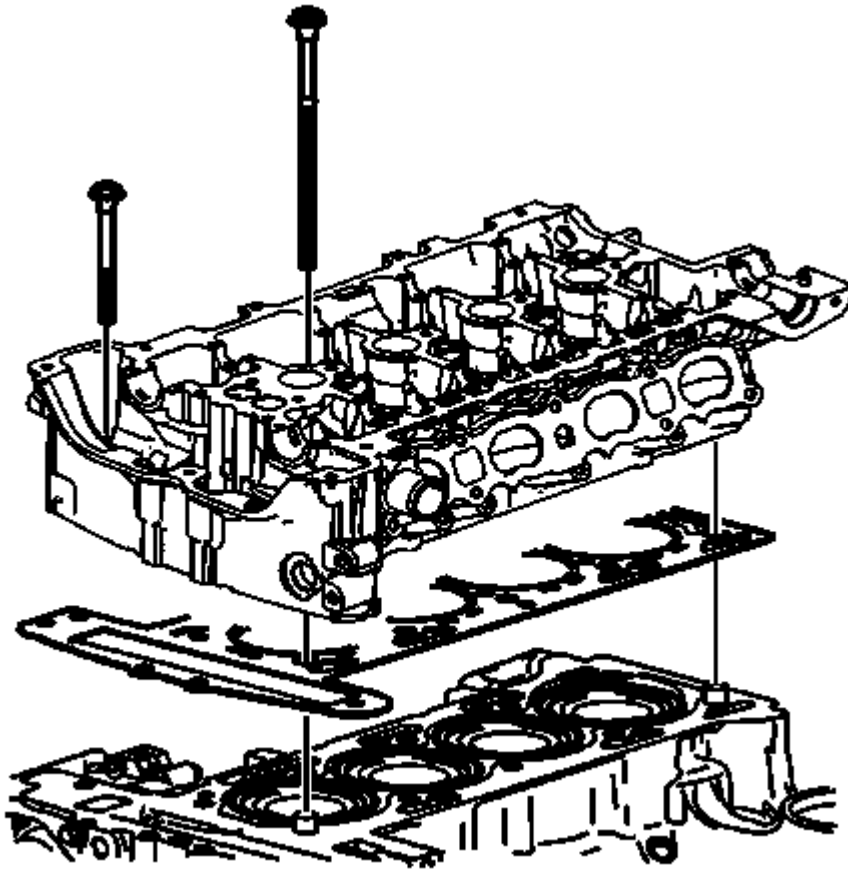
Cylinder Head-To-Block Bolt Removal Sequence
